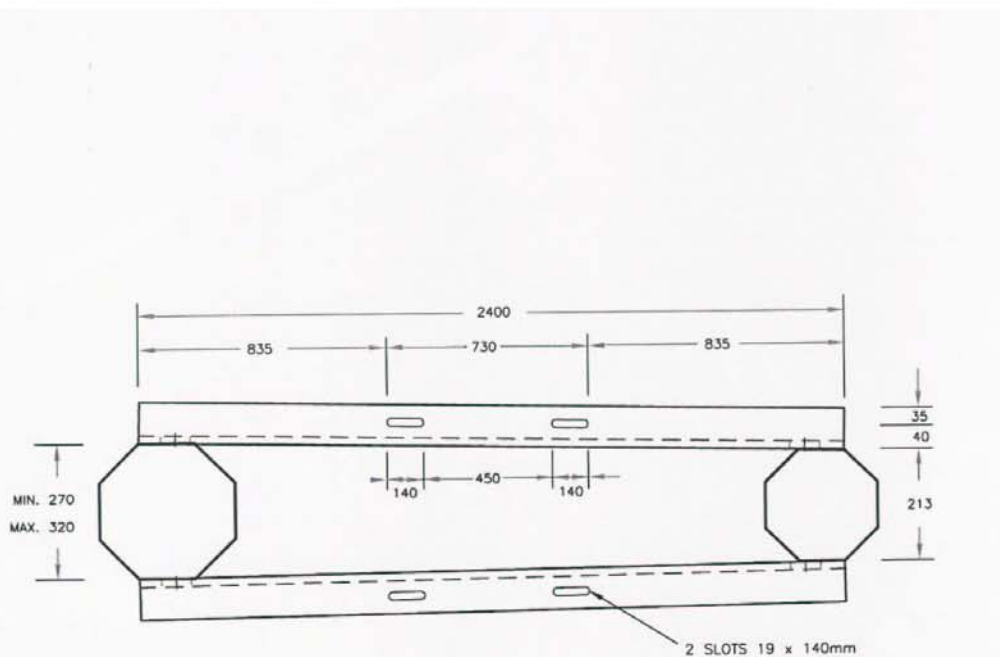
MOUNTING BASE FOR 200kVA AND 300kVA POLE MOUNTED TRANSFORMER
